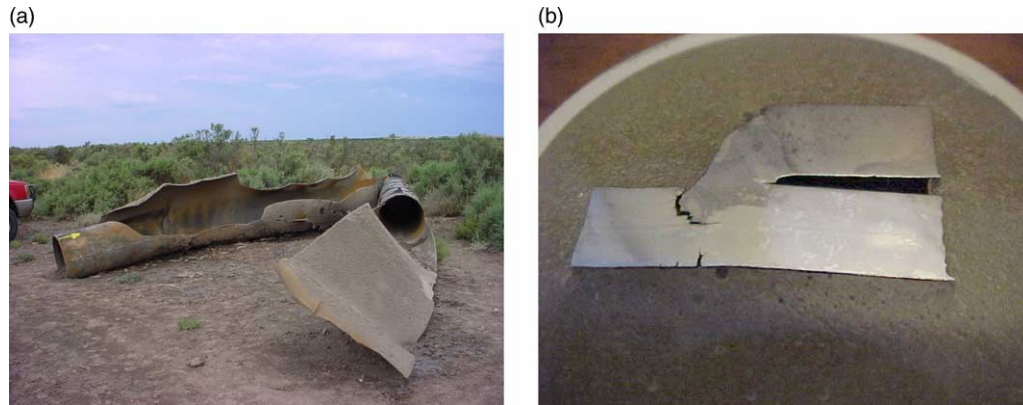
(a) Burst of a 24 in. gas pipeline, started by a rectangular repair patch. (b) ($\times 10$) Secondary crack initiated at the weld toe of the failed repair patch.
